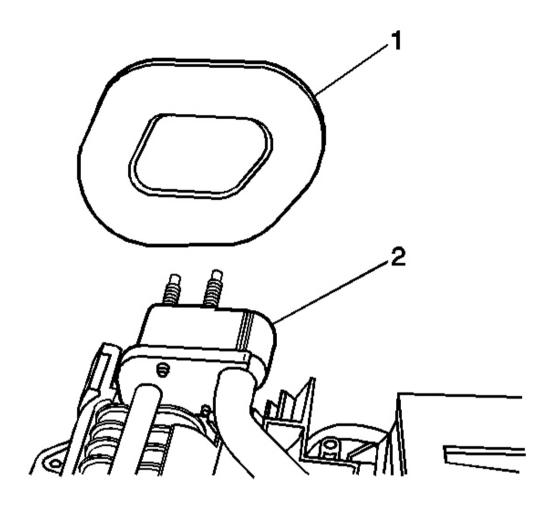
Evaporator Cowl Gasket & Evaporator Courtesy of GENERAL MOTORS CORP.
